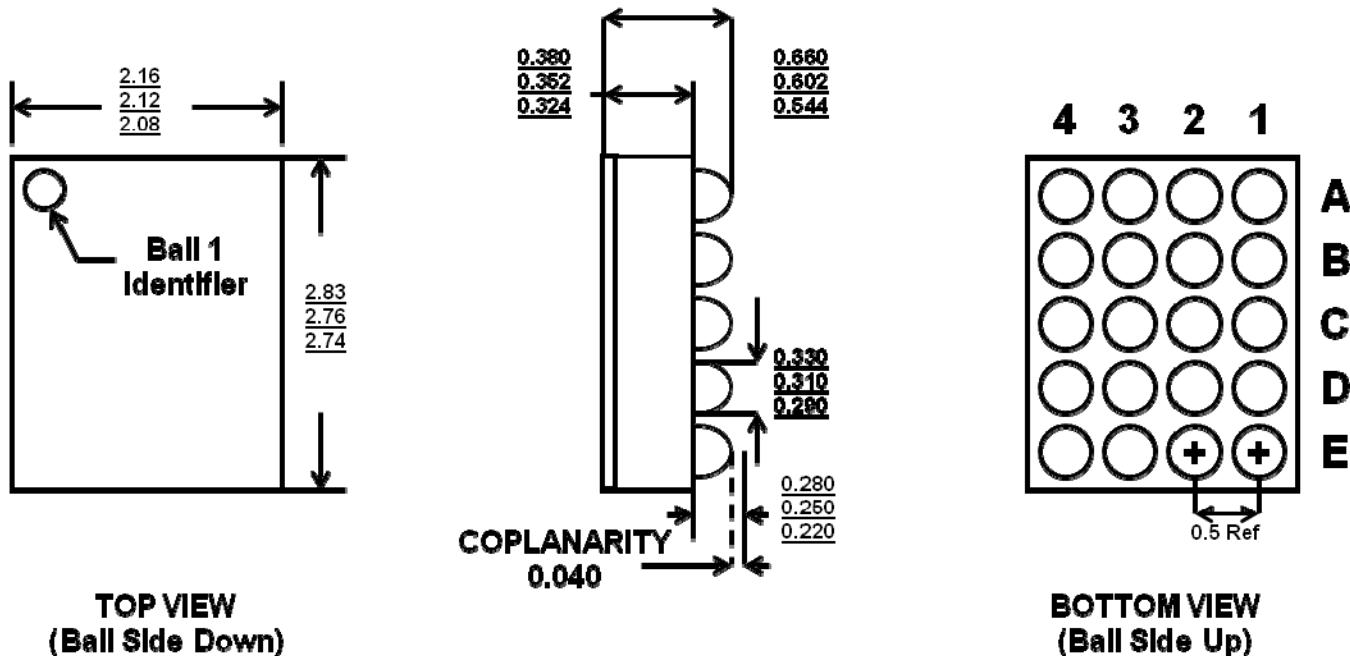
20 Ball WLCSP Package. Dimensions shown in millimeters
